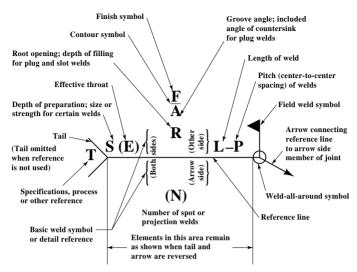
Standard Location of Elements of a Welding Symbol
